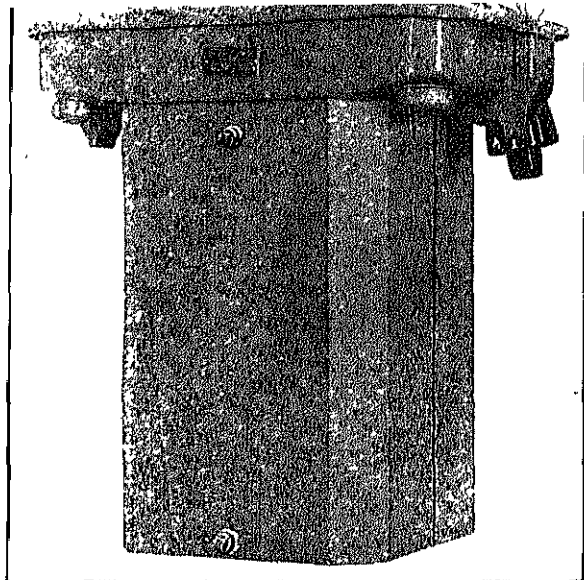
Welded sheet steel tank for transformer shown in Fig. 203.
